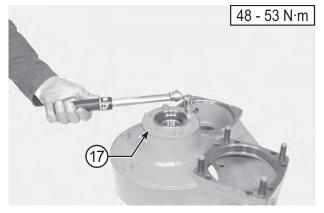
Tighten screws (17) using a torque wrench setting of 48 - 53 N·m.
